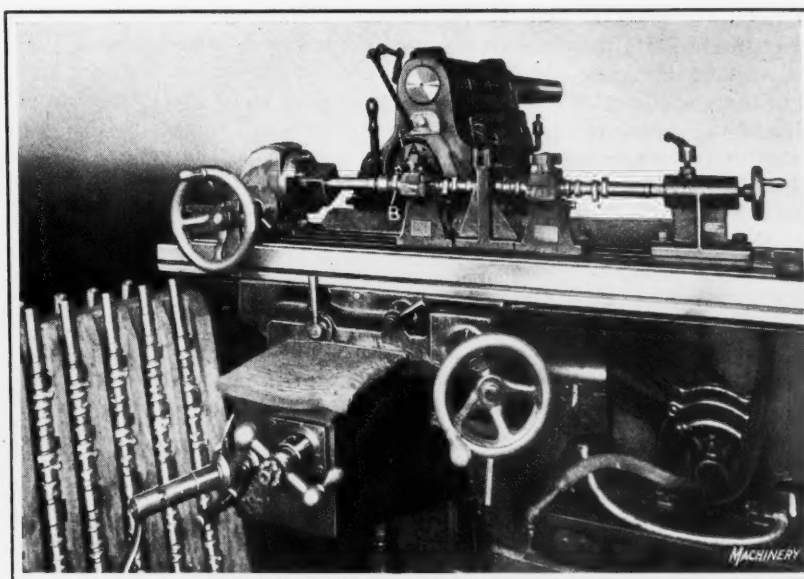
Plain Milling Machine equipped with Indexing Centers for milling the Cams to the Required Form
